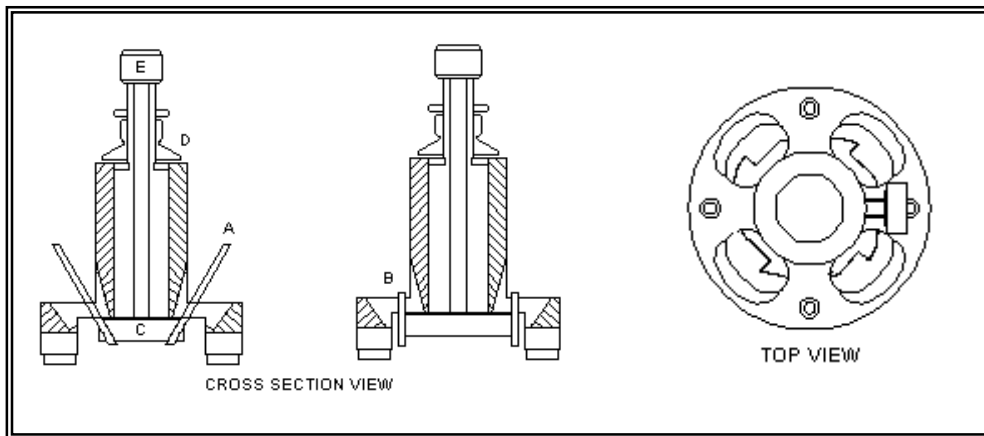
Schematic illustration of the Model 153 Laser Rod Polishing Fixture. The illustration on the left shows the original design for lapping and polishing laser rod crystals. The illustration at right shows a modified mounting block designed to accommodate square wafer pieces as prepared in this report.
